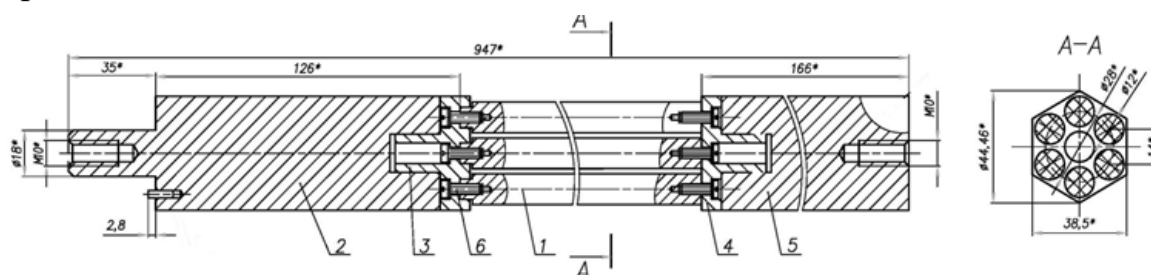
Design model of type 1 (type 2) fuel cassette: 1 — type 1 (type 2) fuel rod; 2 — bottom nozzle; 3 — bottom tube plate; 4 — top tube plate; 5 — top nozzle; 6 — screw.
